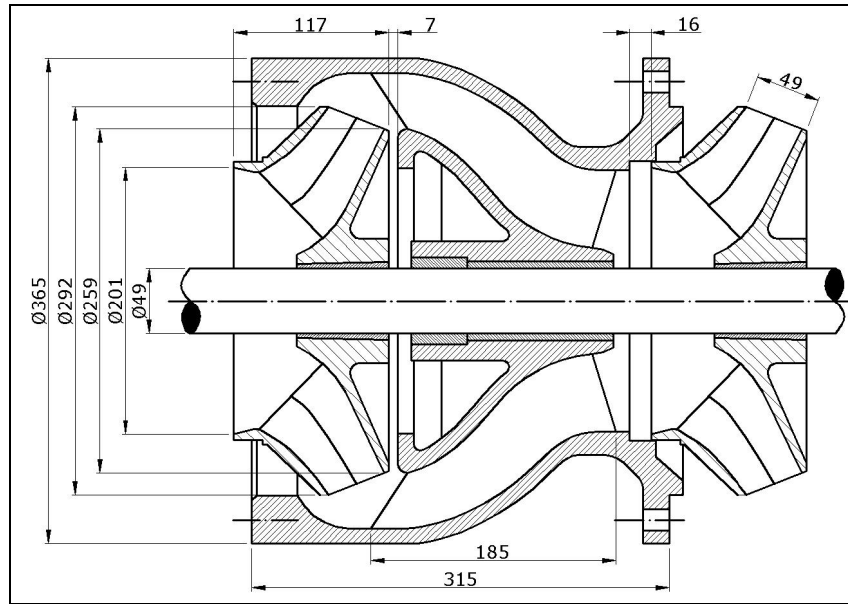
The sectional view of the assembled pump with main dimensions.
